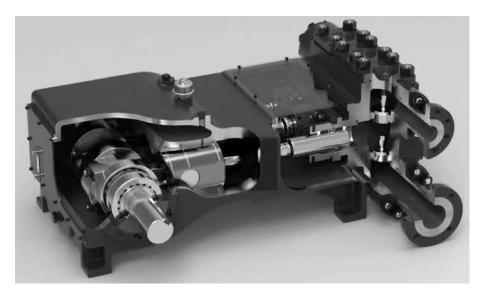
Cutaway view of a typical horizontal pump. Courtesy of GASO Pumps.
